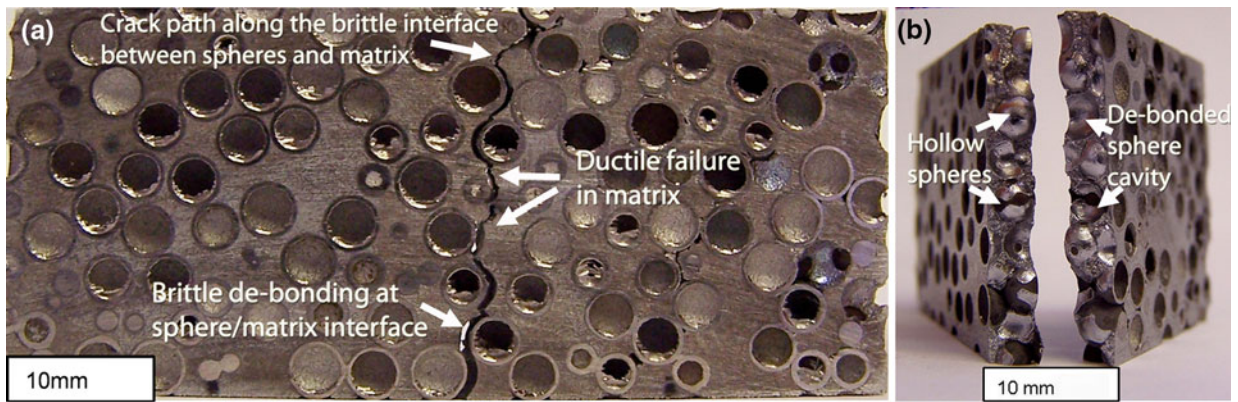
Digital images of a failed cast Al-SS foam sample processed with air cooling (a) the top surface shows the crack propagation from intermetallic layer to intermetallic layer and (b) fracture surfaces showing how spheres pull out from the matrix.
